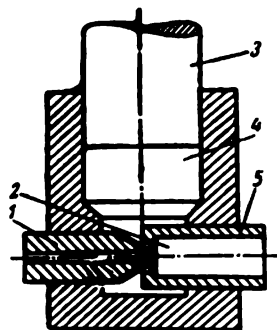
Schematic view of a molding press for the manufacture of tubular solders
